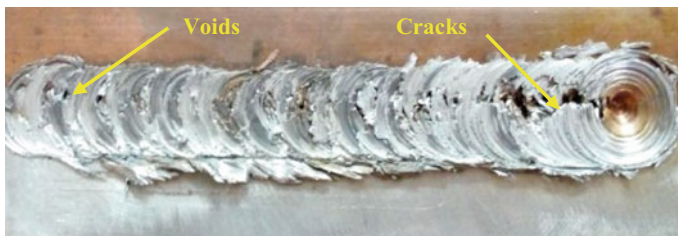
Joint fabricated at 16 kN under LW-WOPO condition (Cracks and Voids at the weld nugget)
